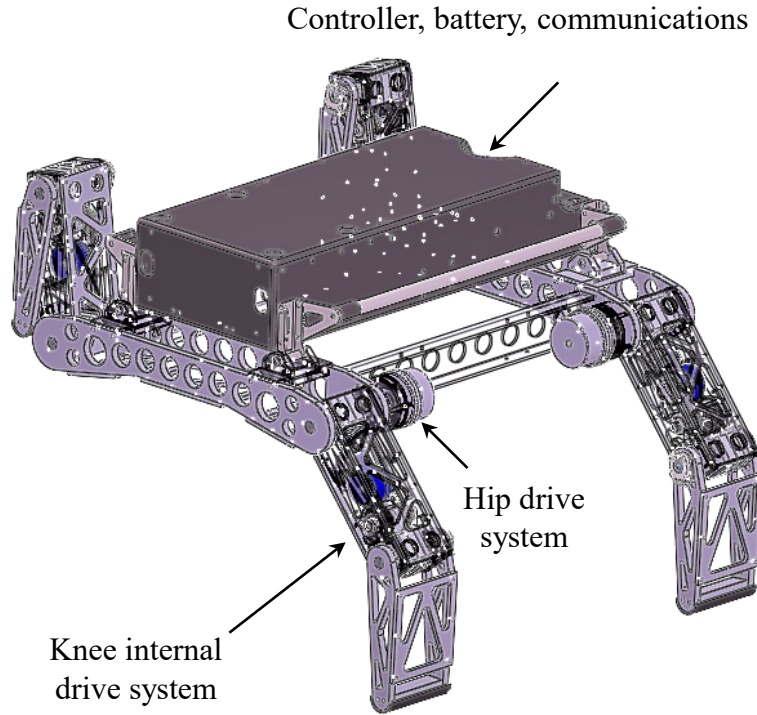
Rotor Buzz RLG CAD Model ISO View
